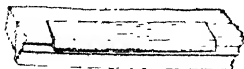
Front Moulding with Fresh Piece Glued in: Unfinished.
